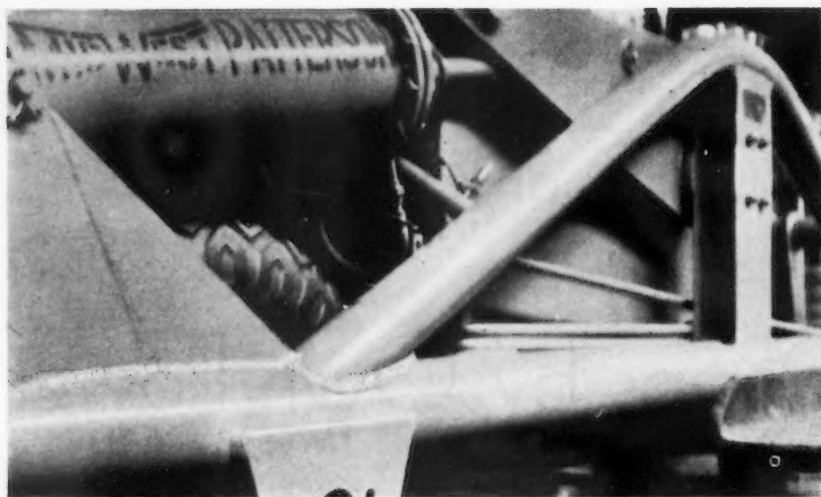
Close-up of welded tubular frame. The welding, done by the shielded arc process, provides maximum strength together with highly desirable flexibility.
